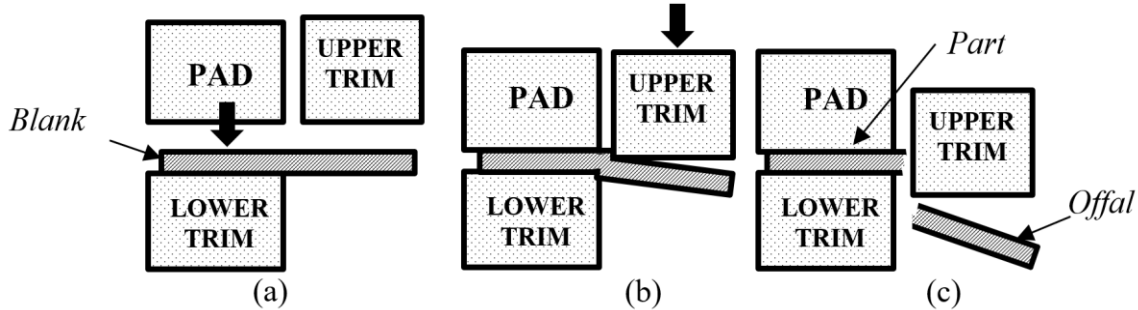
Schematic cross-sectional view of conventional trimming components and operation of a blanking die. (a) Blank panel before pad and upper trim tools make contact. (b) Partially trimmed blank panel after pad makes contact with part side and trim tools initiate shearing. (c) Fully trimmed blank where part is separated from offal.
